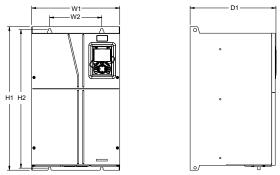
Wall-mounting diagram of inverters of 660 V, 22 to 132 kW
